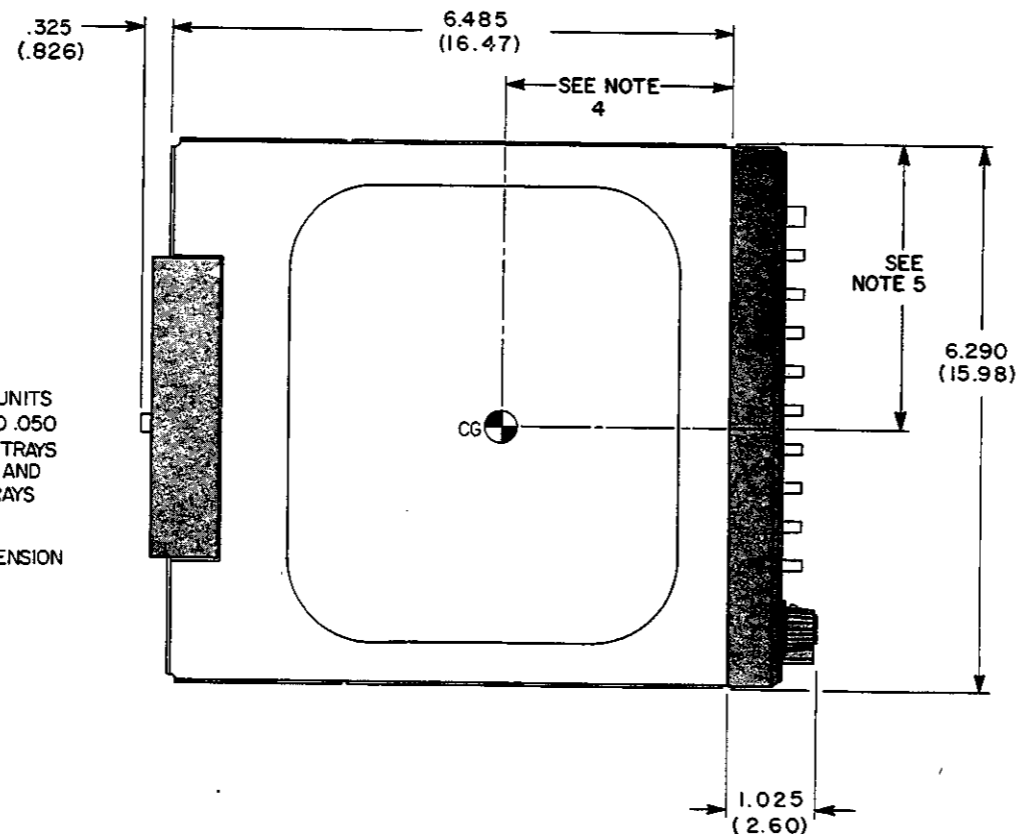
OUTLINE AND MOUNTING DRAWING
